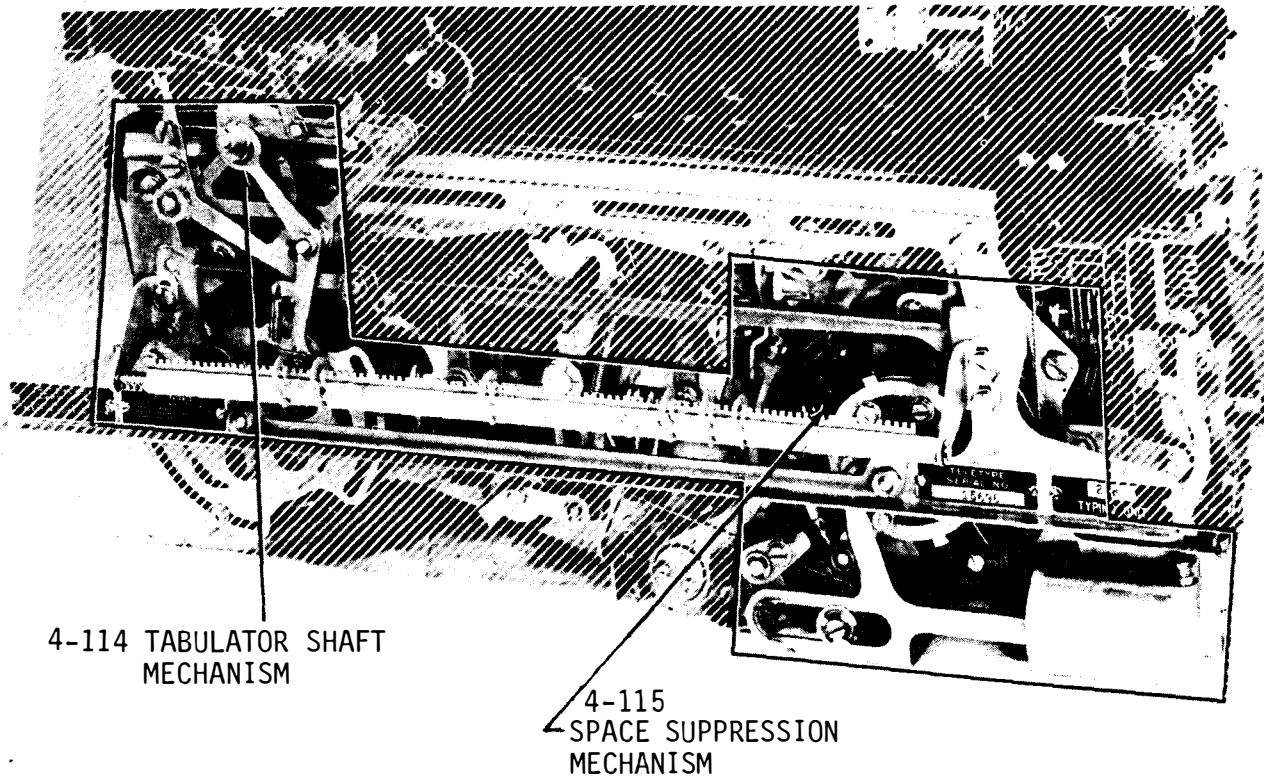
Horizontal Tabulator Mechanism, (Early Design), Front View
